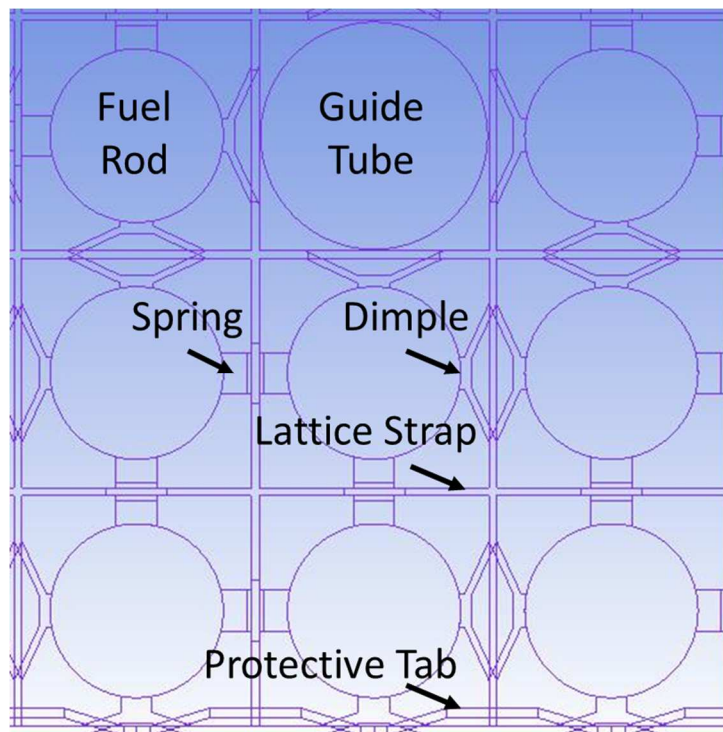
Zoom on fuel rods, guide tubes, grid strap, springs and dimples (top view)
